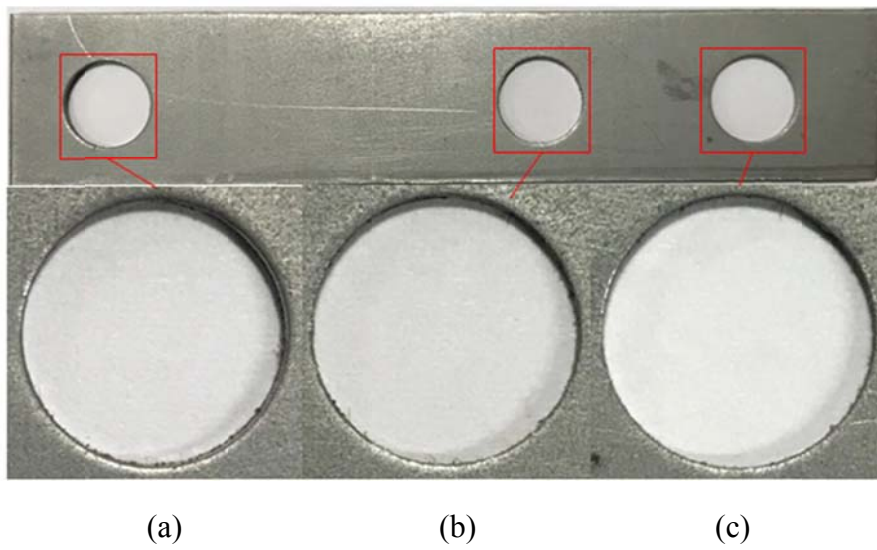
Sheet specimen condition after punching test with additive and comparative punch: (a) holes shape by additive punch, (b), (c) holes shape by comparative punch of SKD-11 and HWS
